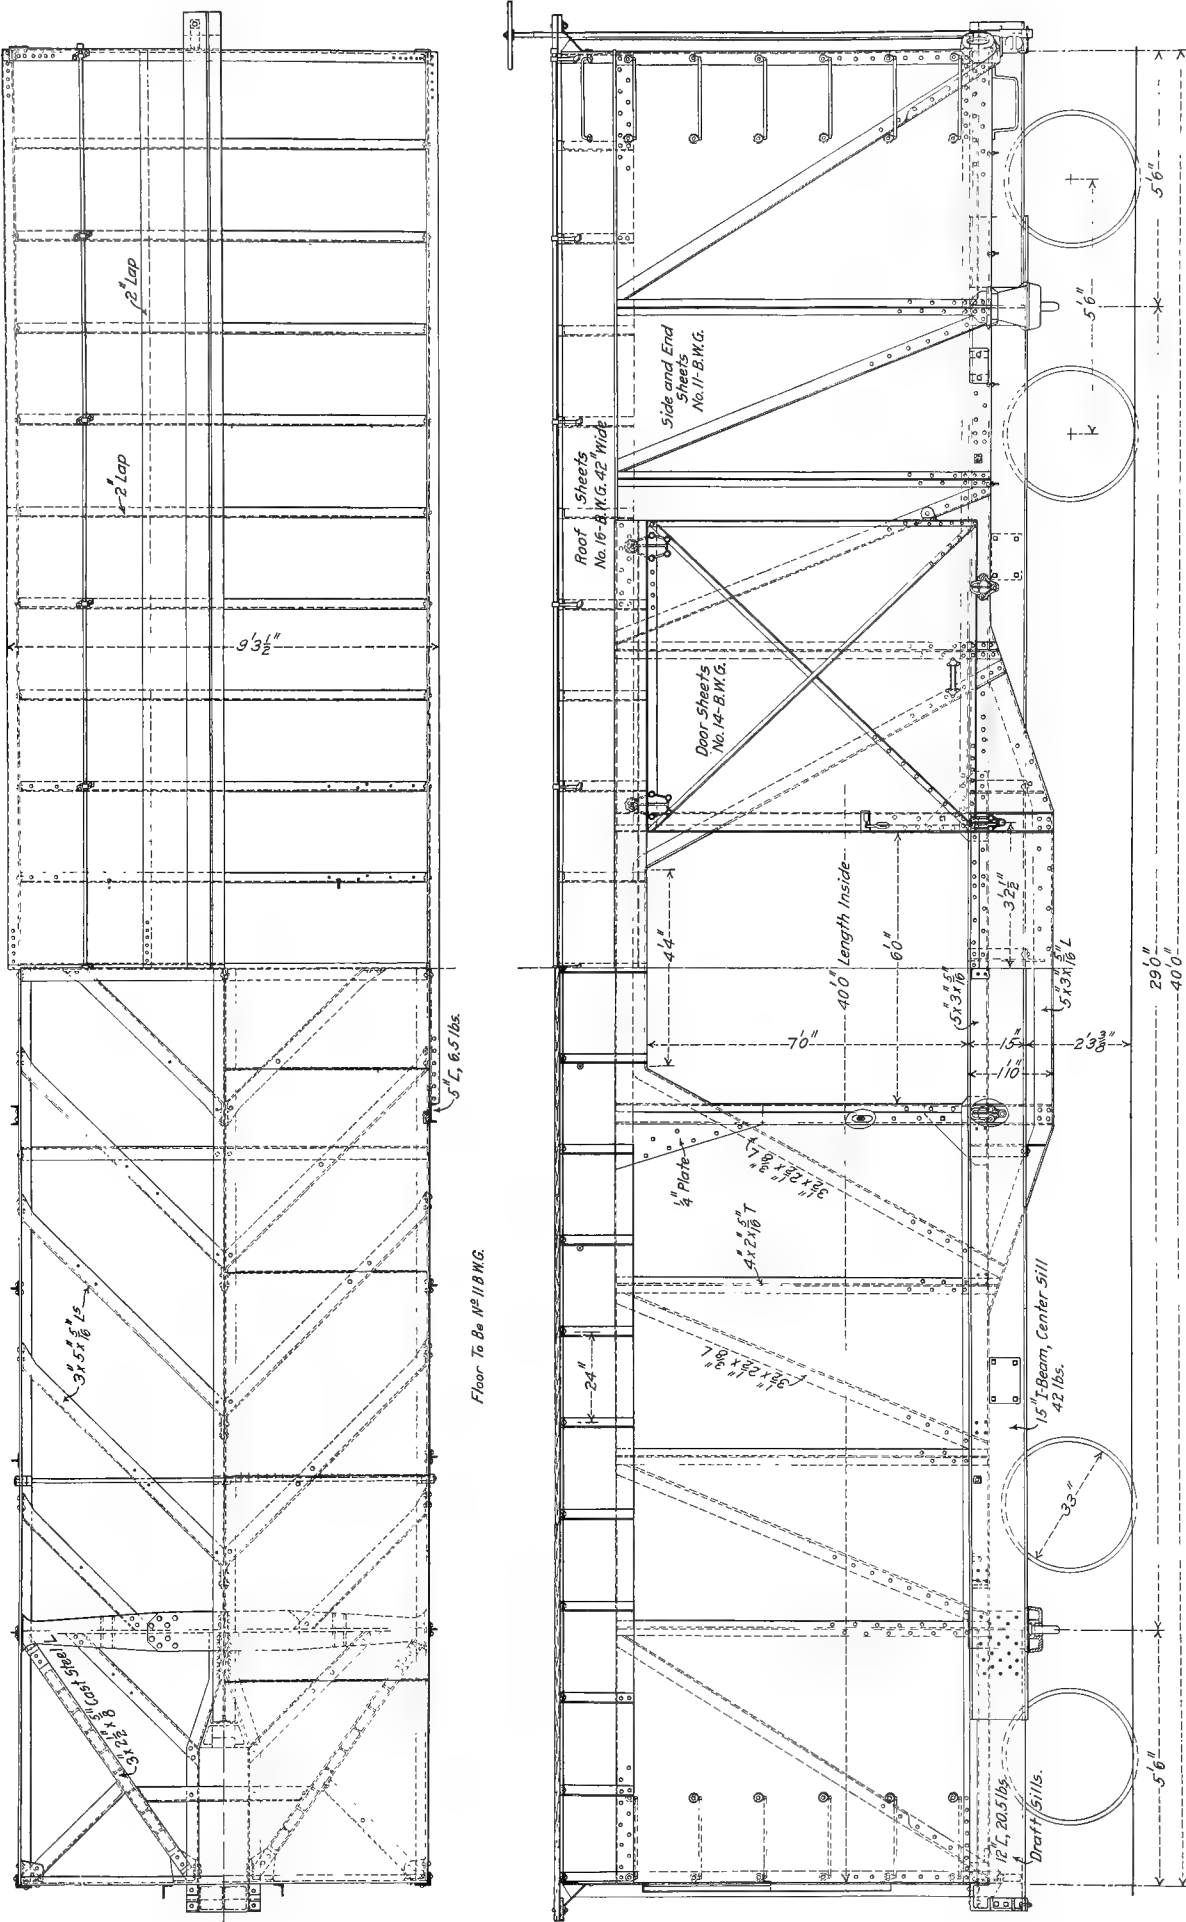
Side Elevation and Plan of Union Pacific All-Steel 50-Ton Capacity Box Car.
